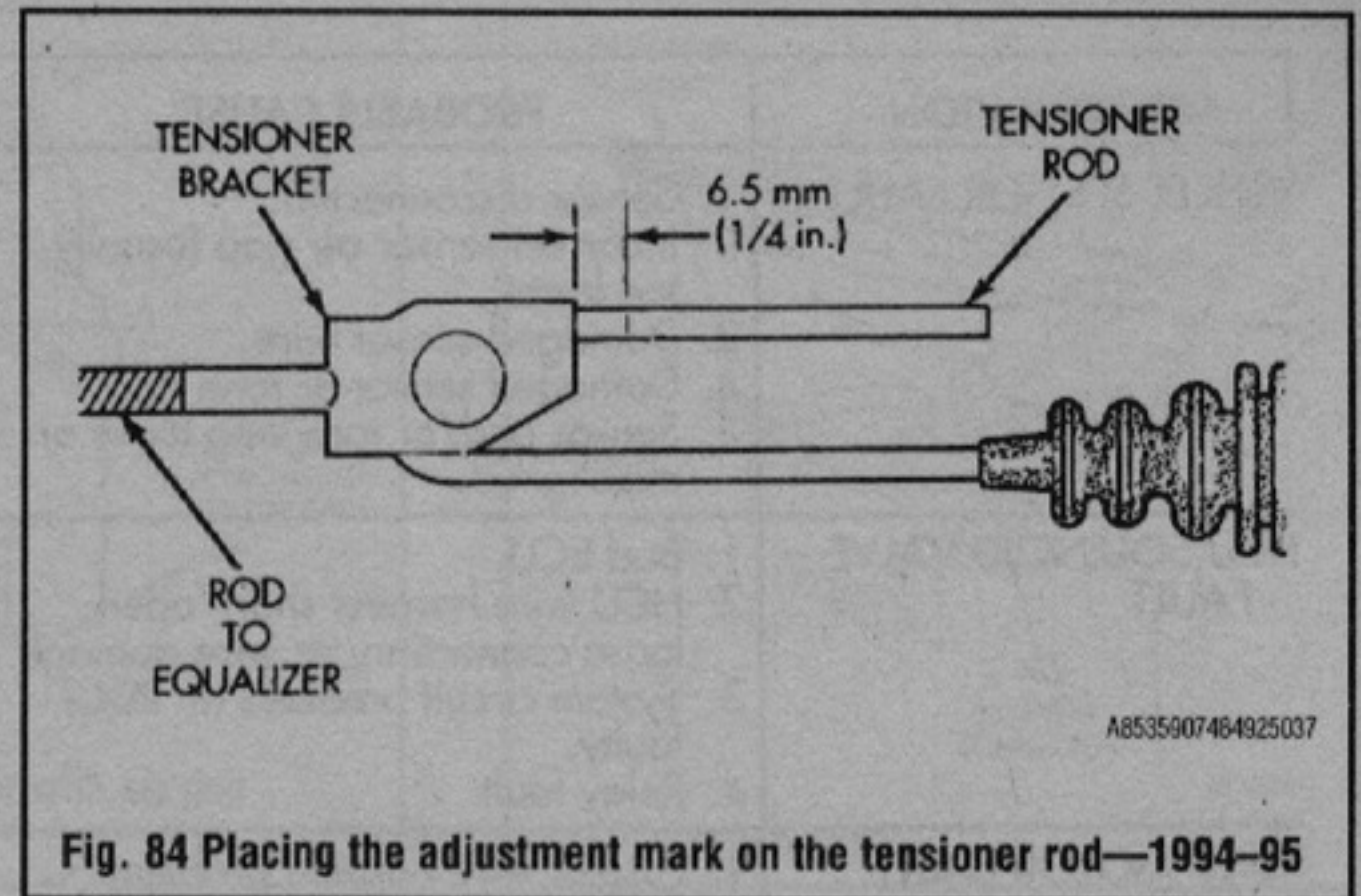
Placing the adjustment mark on the tensioner rod—1994-95
